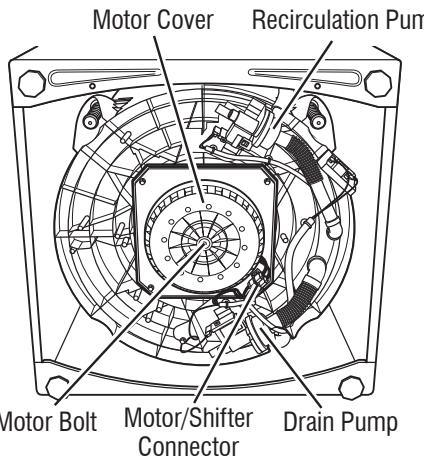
Drive Area, Viewed From Bottom, Sound Pad (If Equipped) Removed.
